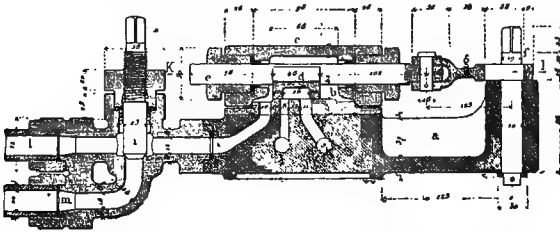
Valve chest, vertical section along I J (Fig. 25).
